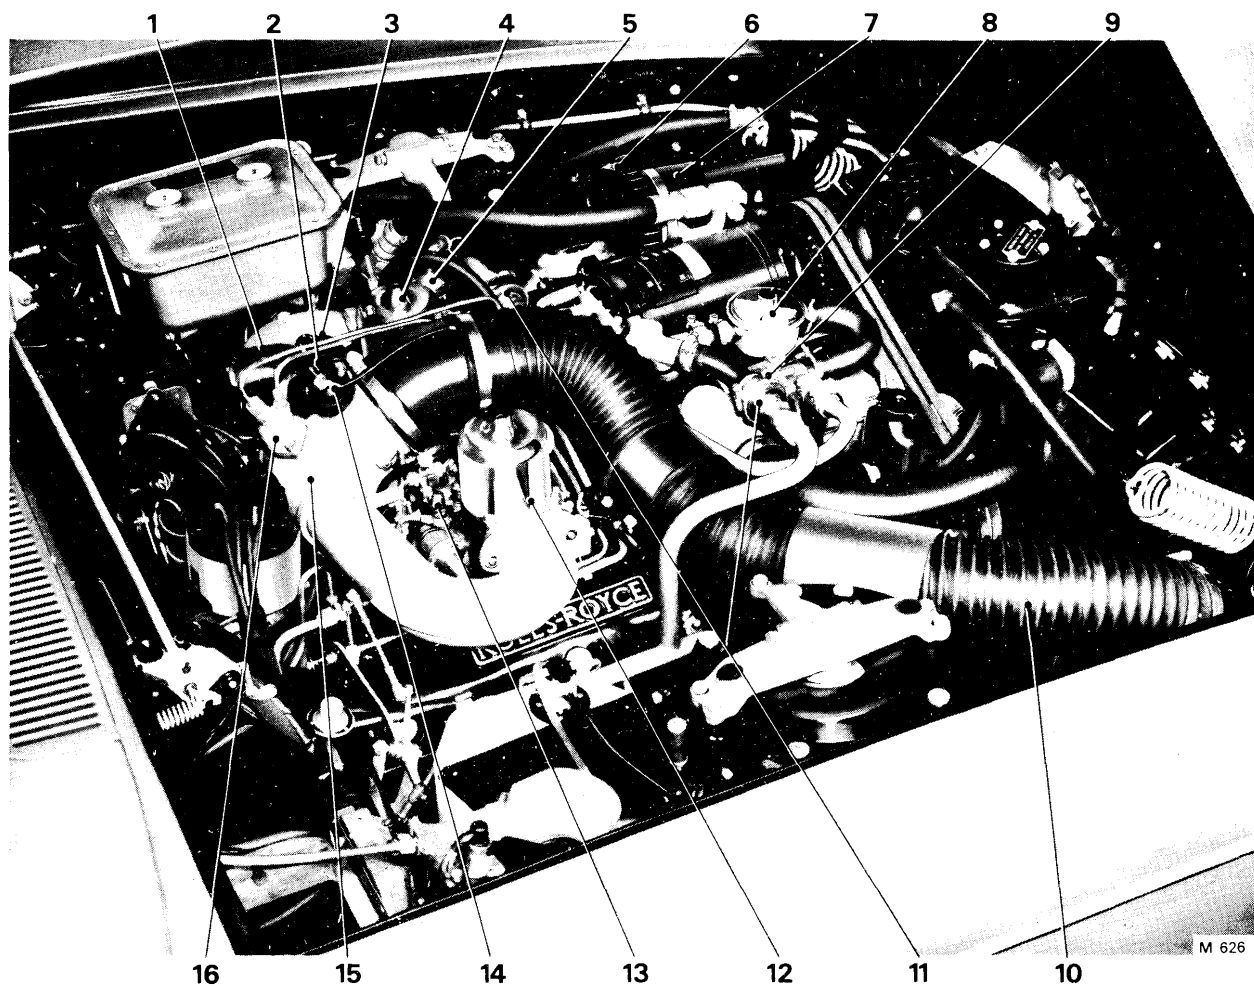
VIEW INSIDE ENGINE COMPARTMENT (Later Cars)
